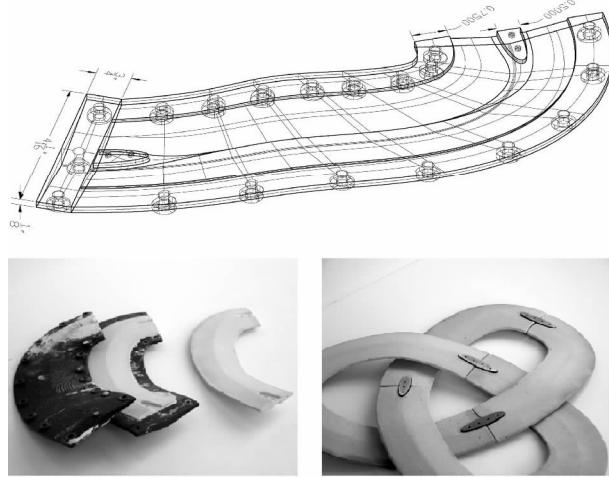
Digital model of the mold, 3d printed mold with the casted component, stainless steel fasteners and the Assembly knot
